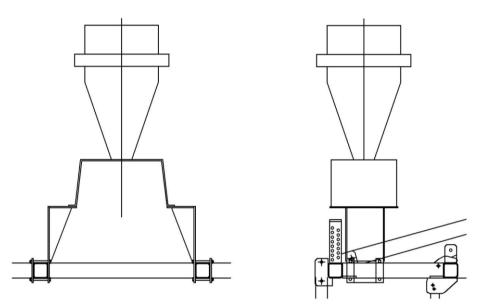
Mounting the SP 5 seeder to the KUS frame.
